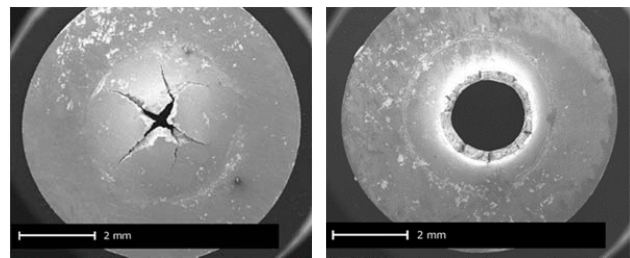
Fracture surfaces of the SPT specimens of the CoNiCrAlY coating at (a) 500 °C and (b) 700 °C [26]
